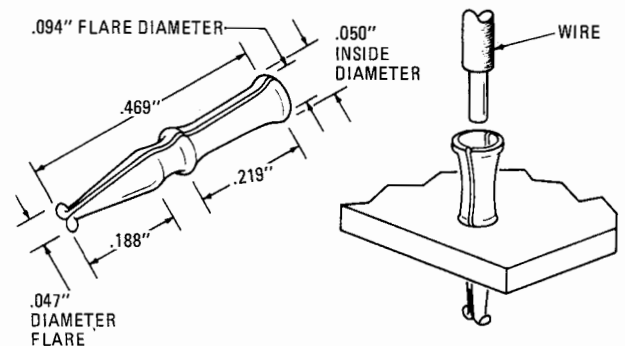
MINIATURE TUBULAR TERMINAL fits snugly into $\frac{1}{16}$ -inch hole and can be used for component or wire connection.
